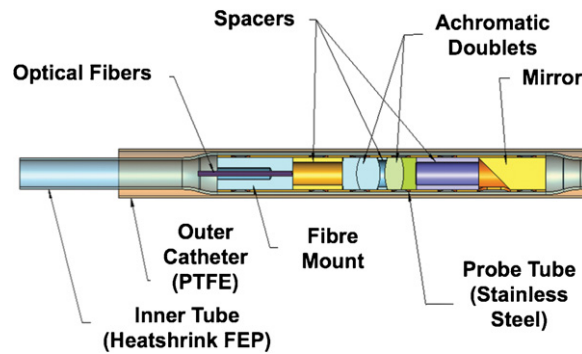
The mechanical components of the probe assembly were manufactured using conventional turning and milling techniques. The probe tube was machined from a stainless steel hypodermic tube, while the optical spacer rings (used to separate optical components) were turned from brass. The fibre mount was turned from brass with a machined slot (0.5 mm wide by 0.09 mm) into which the fibres were bonded and protected by an outer catheter and inner tube. The lenses were standard catalogue components, which were edged down to fit within the stainless steel tube housing. The beam directing mirror was custom made, using standard optical grinding and polishing techniques. PTFE, polytetrafluoroethylene; FEP, fluorinated ethylene propylene.
